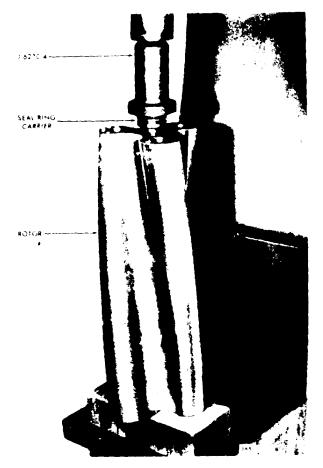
D-14. Installing Oil Seal Ring Carrier on Blower Rotor
